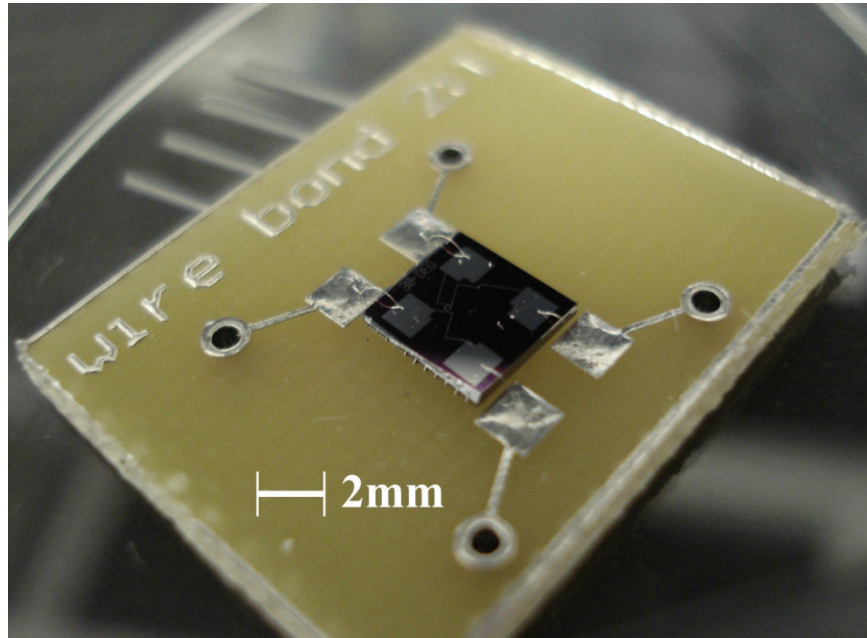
Gold wire bonds created between solder-covered copper pads on a PCB and aluminum pads on a sensor pad chip.
